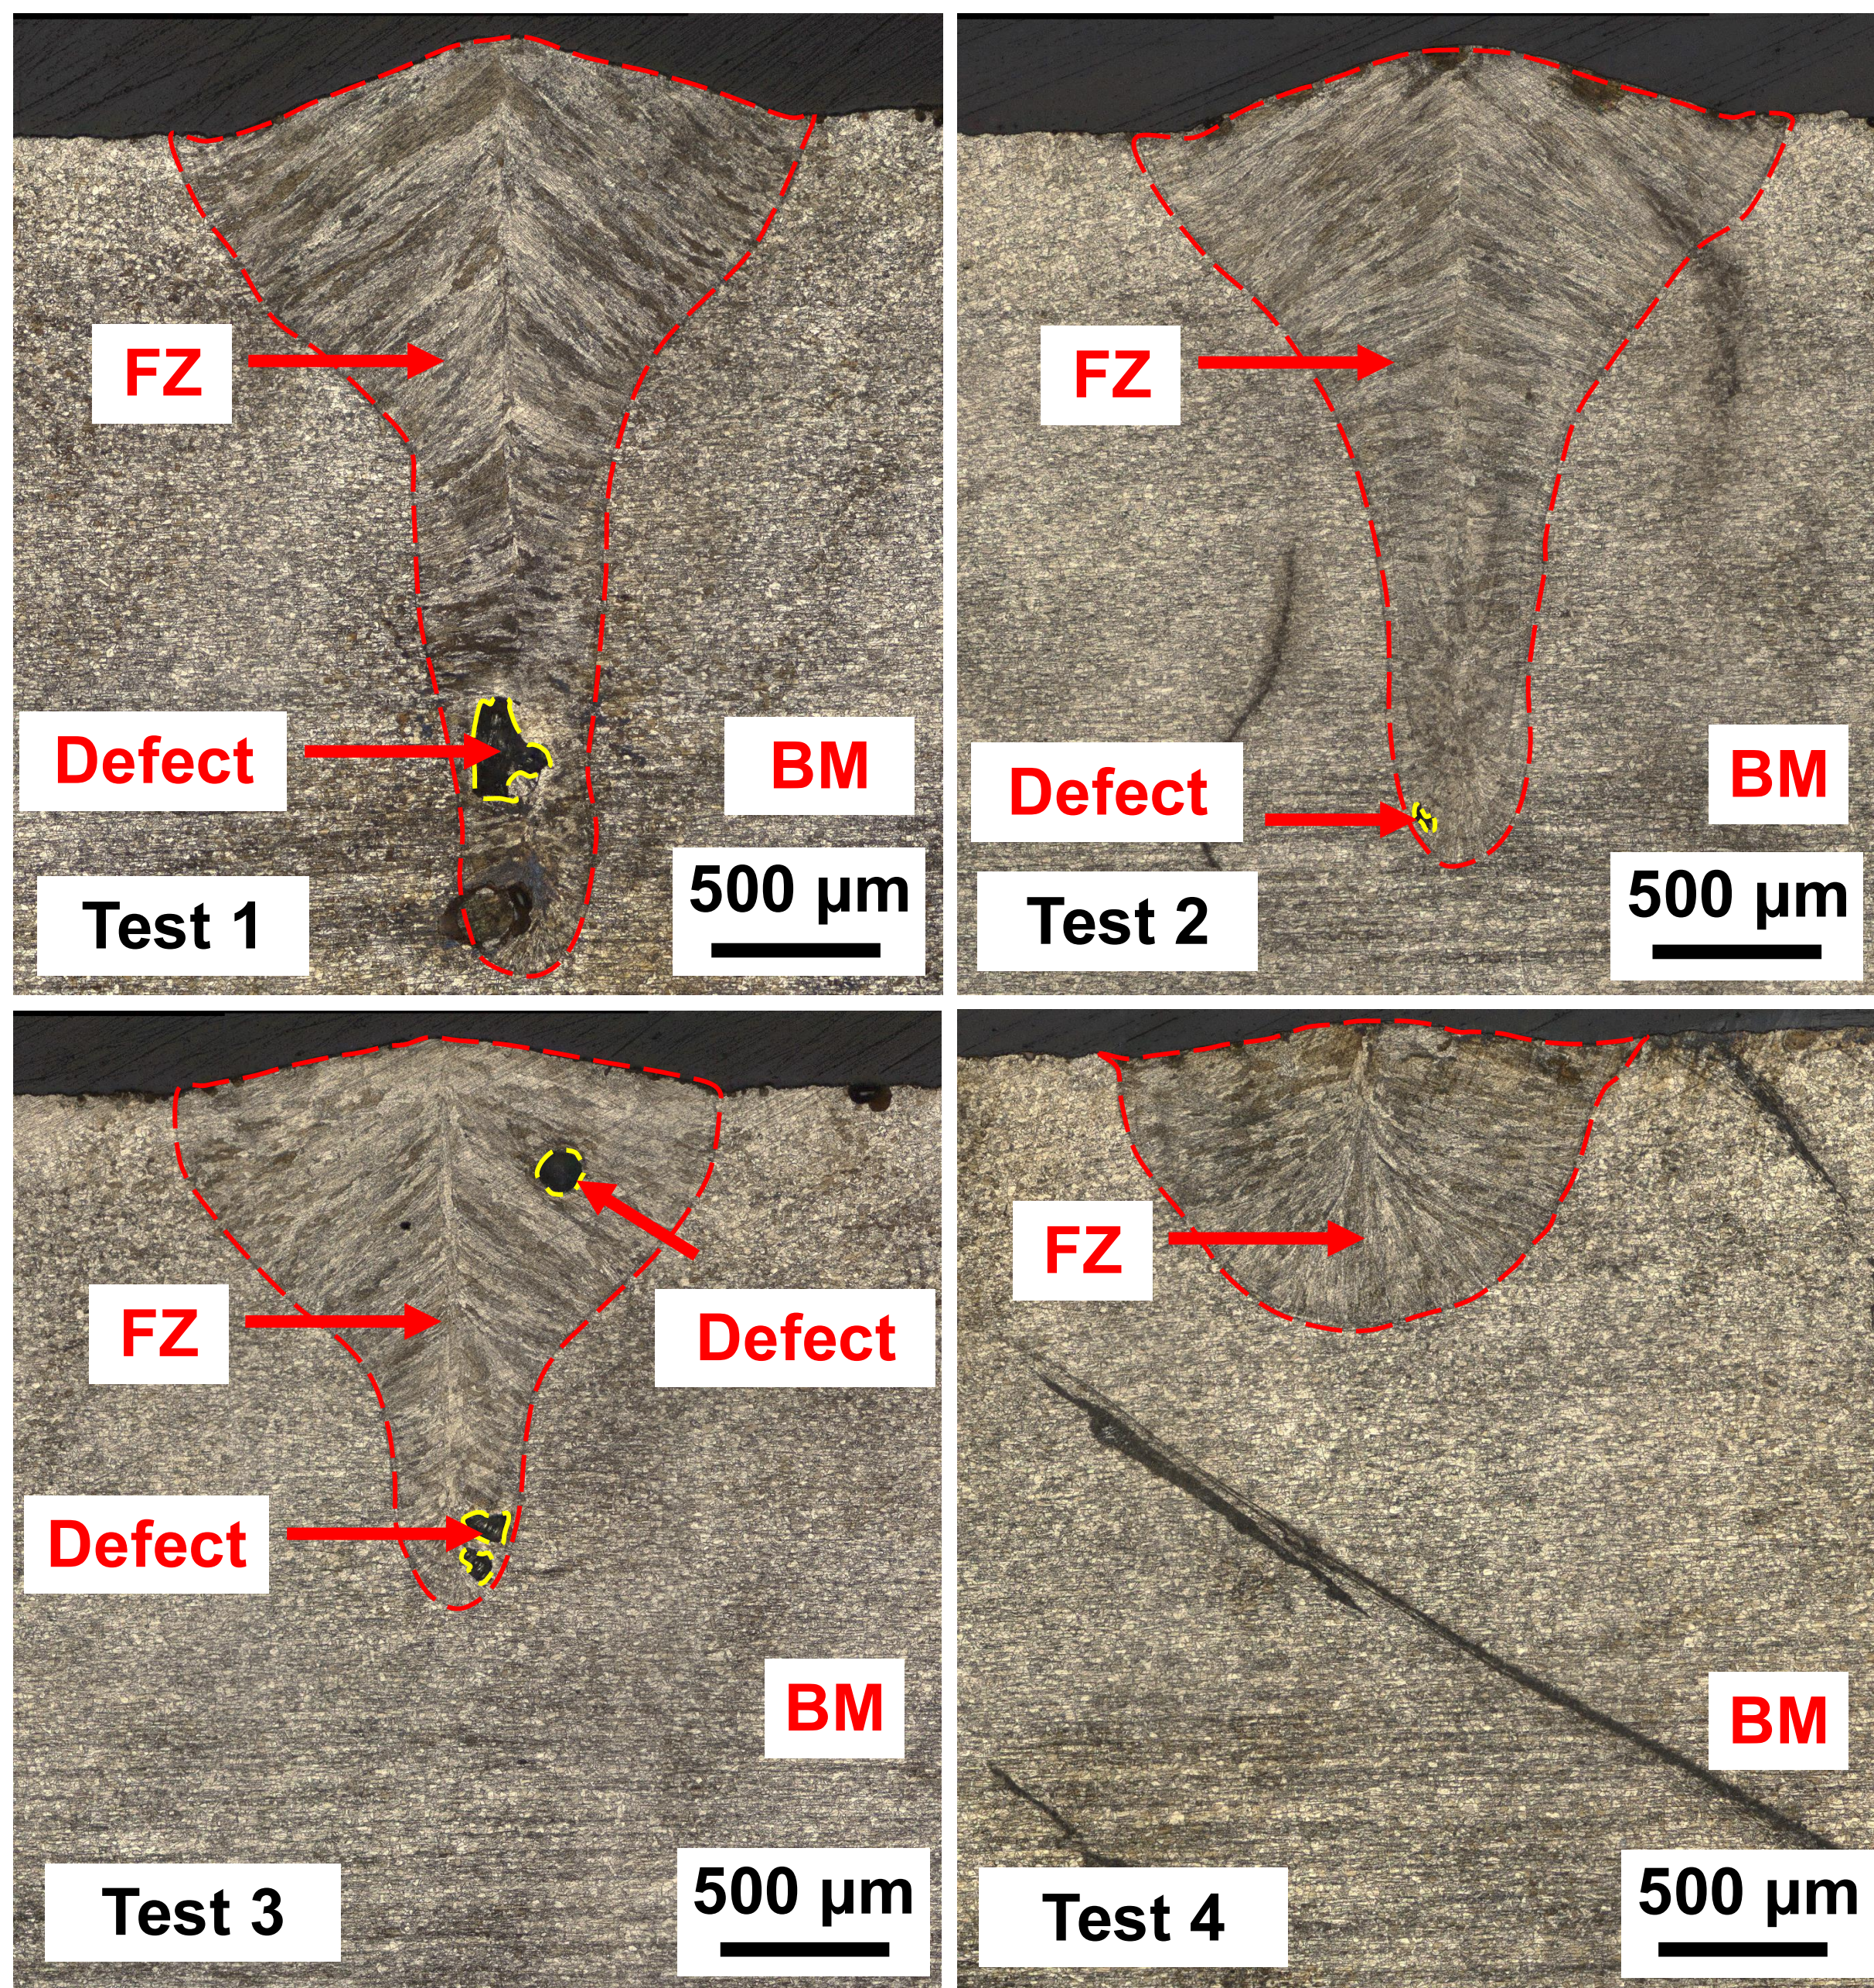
Weld cross-sections for Tests 1–4. FZ - Fusion Zone; BM - Base Metal.
